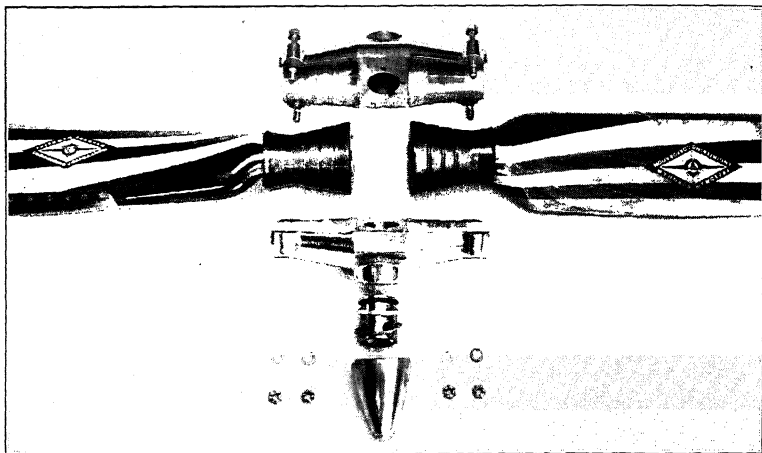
Adjustable-pitch propeller with wood blades. (Courtesy Freedman Burnham Engineering Corp.)
